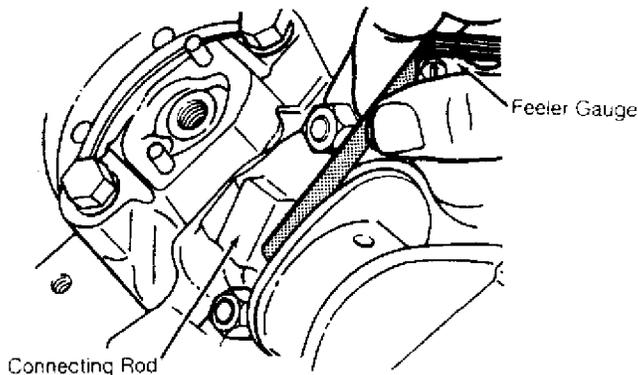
Measuring Connecting Rod Side Clearance - Typical
